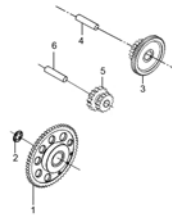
CAMSHAFT-VALVE (P05-S070-0007)
